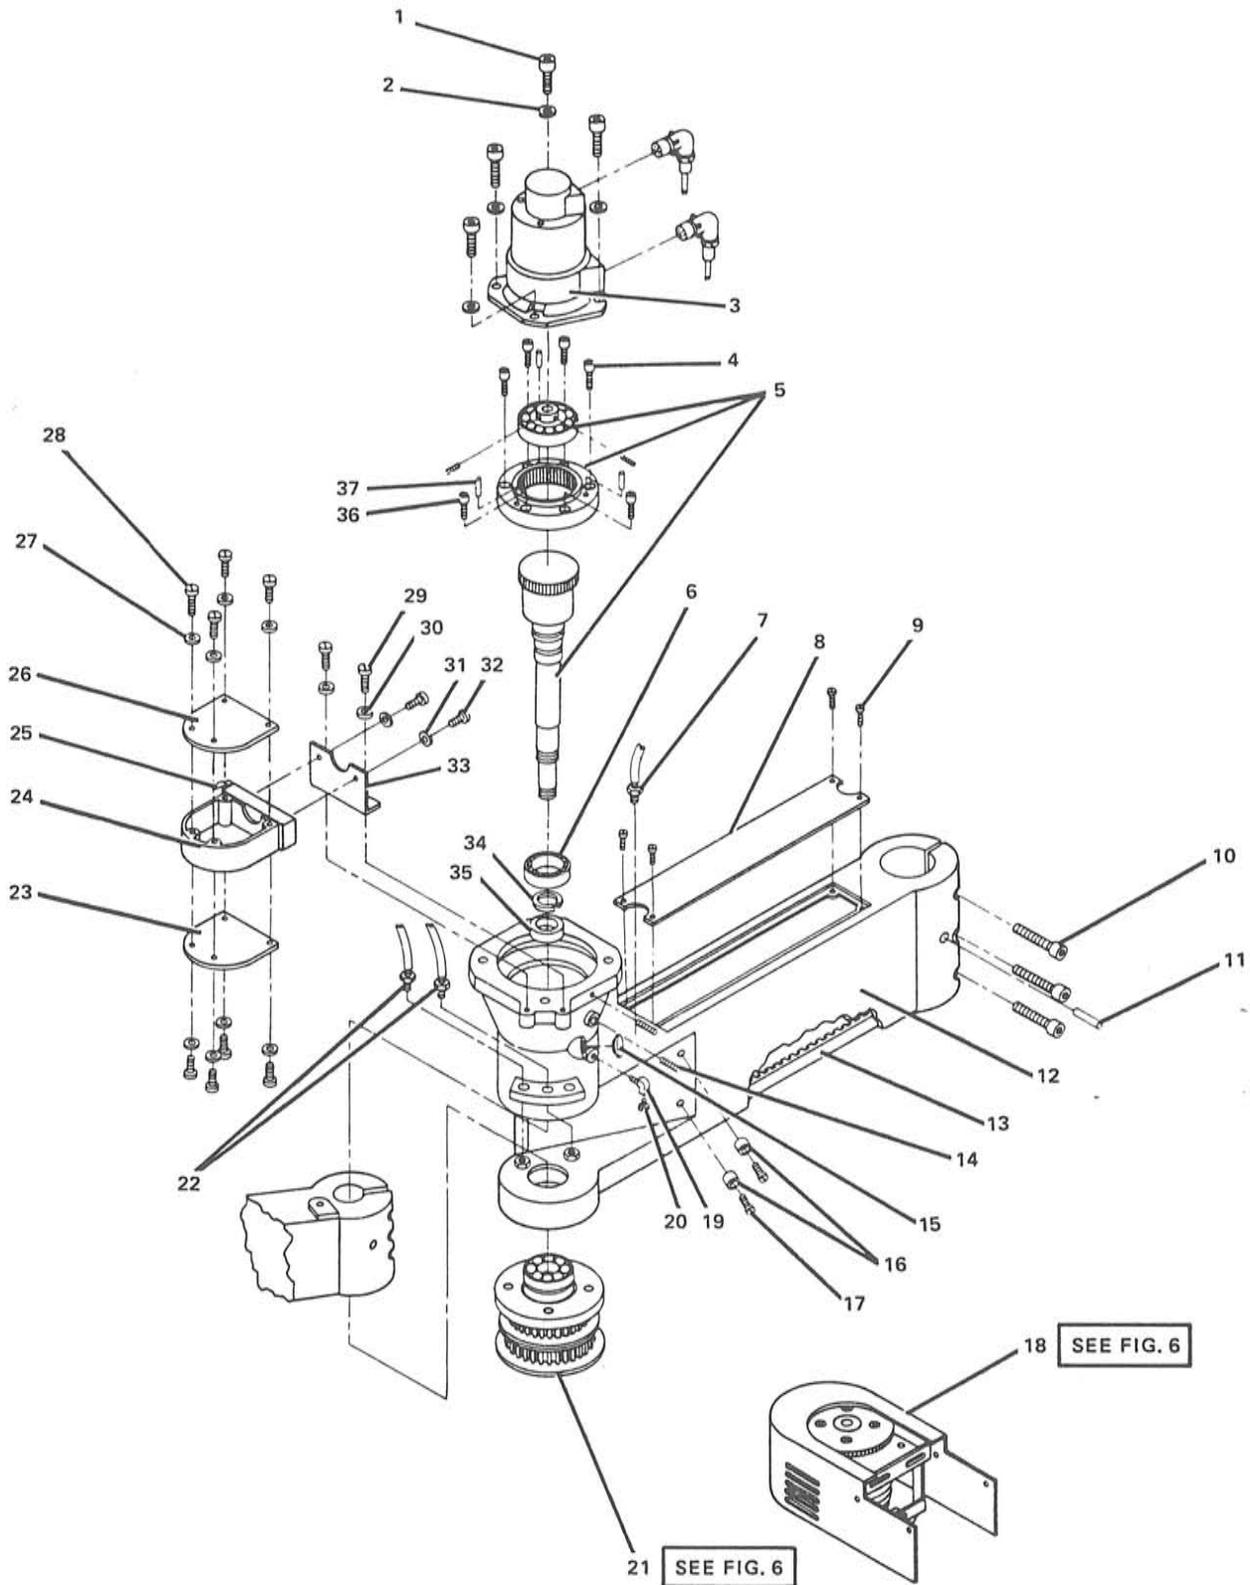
THETA TWO ASSEMBLY. SEE LIST 2.
